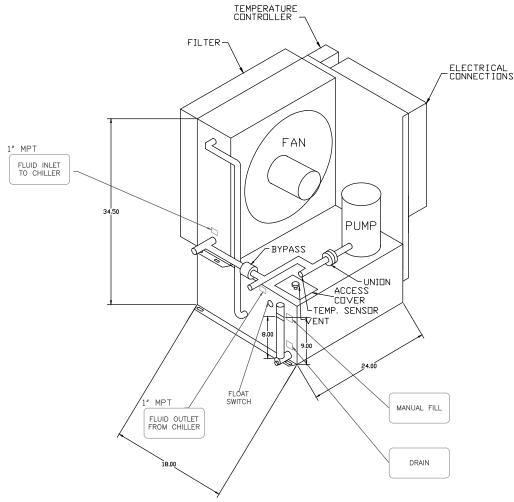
Heat exchanger layout diagram (dimensions in inches)^(a)
